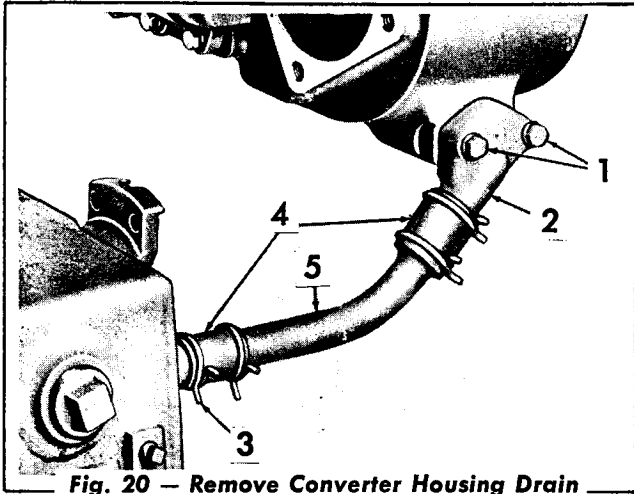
Remove Converter Housing Drain Tube Assembly
